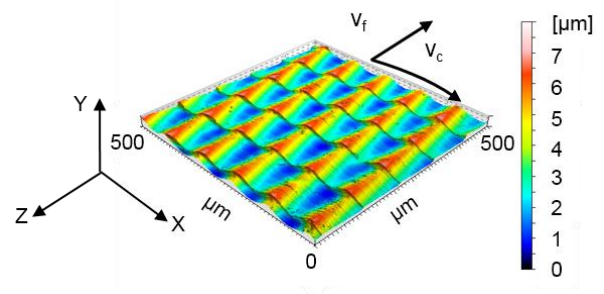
Example of surface created by ultrasonic vibration superimposed milling [5]
